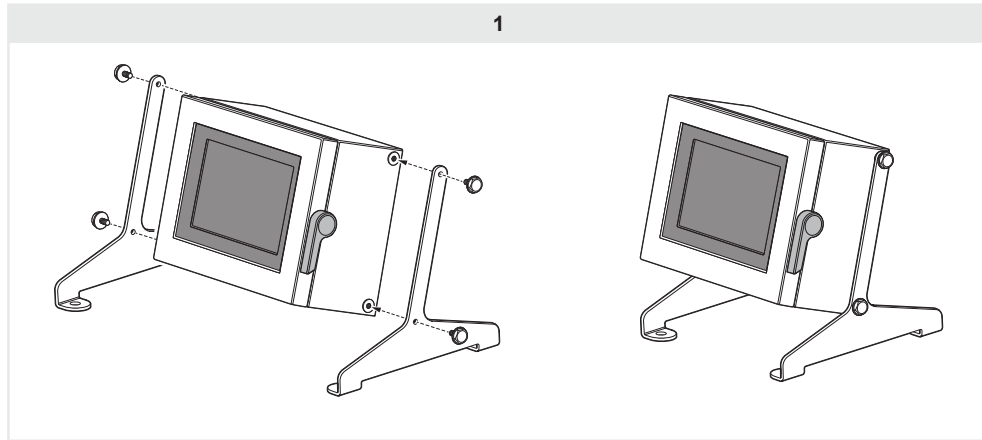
Attaching the table top stand to the MI for use in the laboratory.
